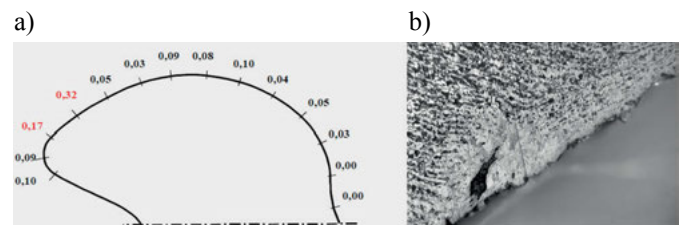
A view of: a) size of the decarbonized layer on a schematic cross section of a forging, b) fracture in the decarbonized surface layer
